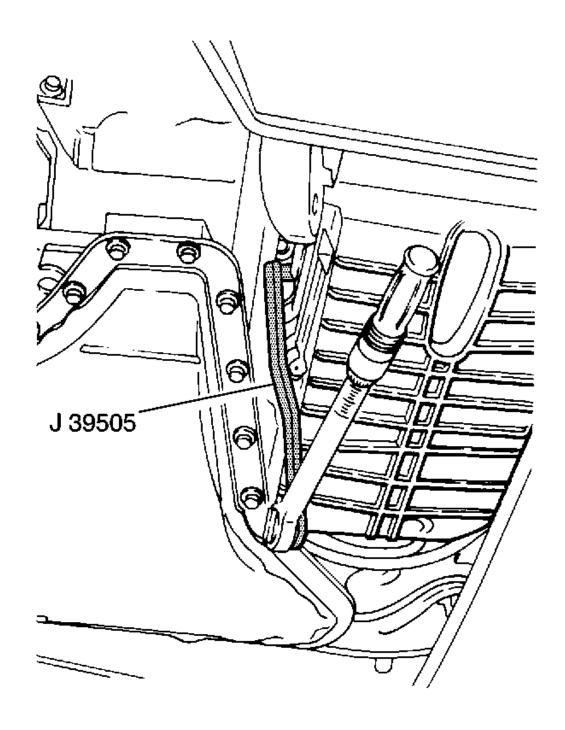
Installing Right Oil Pan Side Bolts Courtesy of GENERAL MOTORS CORP.
